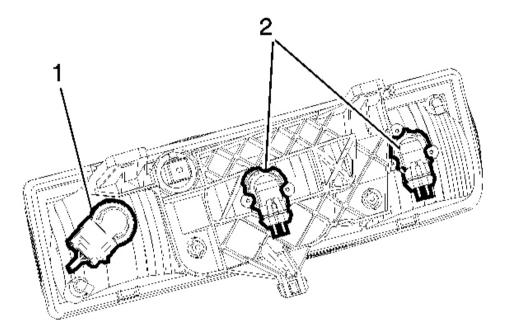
Removing/Installing Park/Turn Bulb Into The Bulb Socket Courtesy of GENERAL MOTORS CORP.
